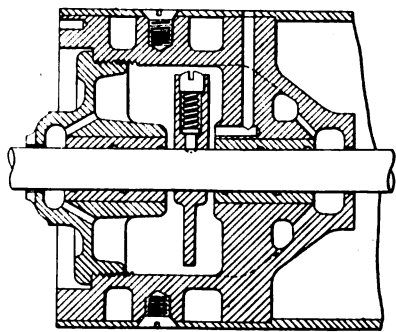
ORIGINAL ROLLER DESIGNED FOR USE OF SLEEVE BEARINGS WITH OIL LUBRICATION
